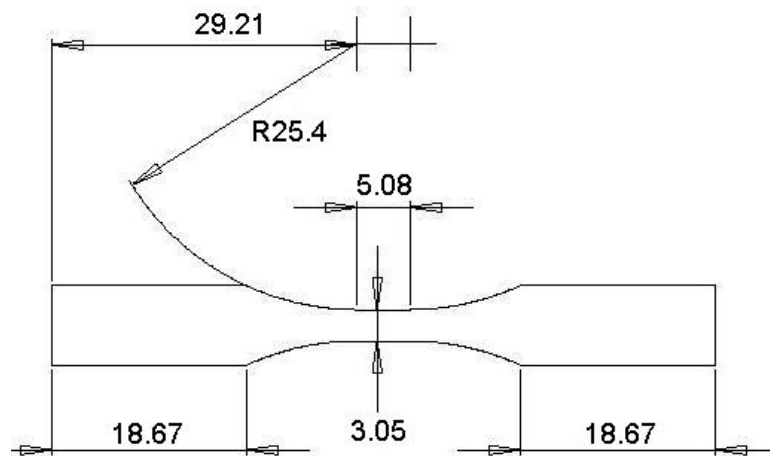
Drawing of the coupon specimen with dimensions labeled in mm.
